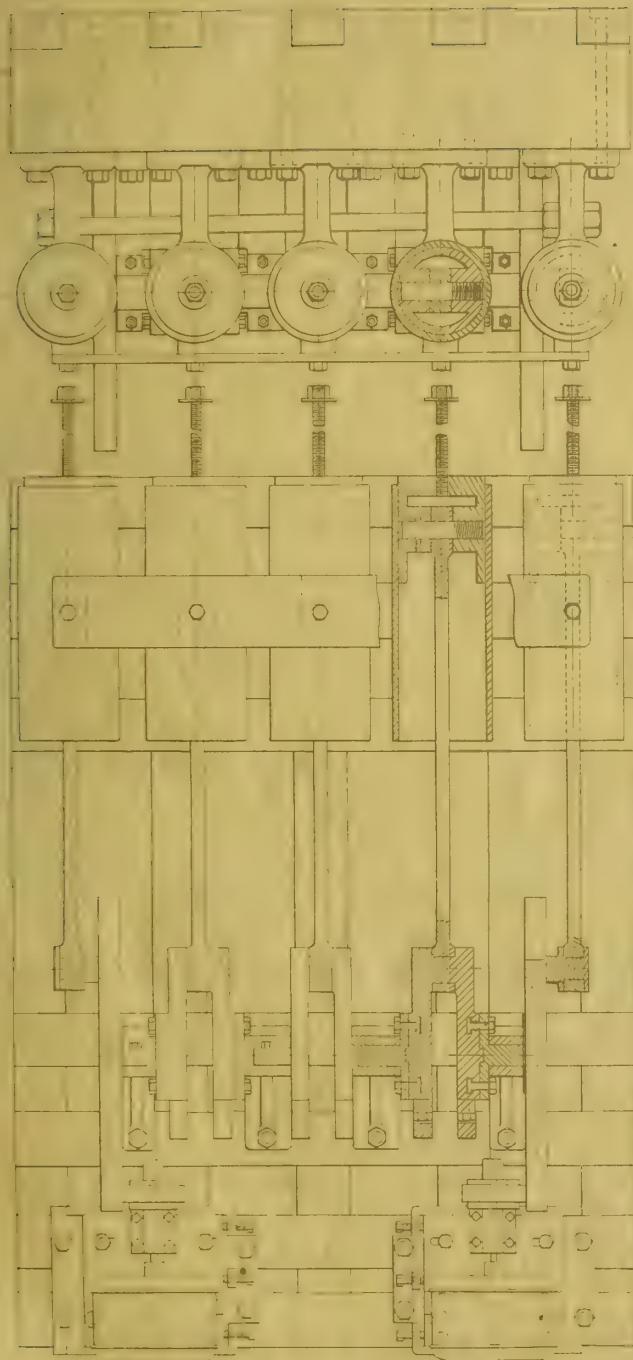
shows the assembly of Mr. Burtis' design. It consists of a wooden base carrying a pair of disks on an axle which has five cranks, two outside and three inside the disks. The cranks are mutually adjustable, four of the flanges of the crank shaft being divided into degrees for this purpose. To the cranks are connected pistons to which may be attached adjustable weights. Of the twelve variables concerned in the balancing of a five crank engine, eight are susceptible of variation in this apparatus.
